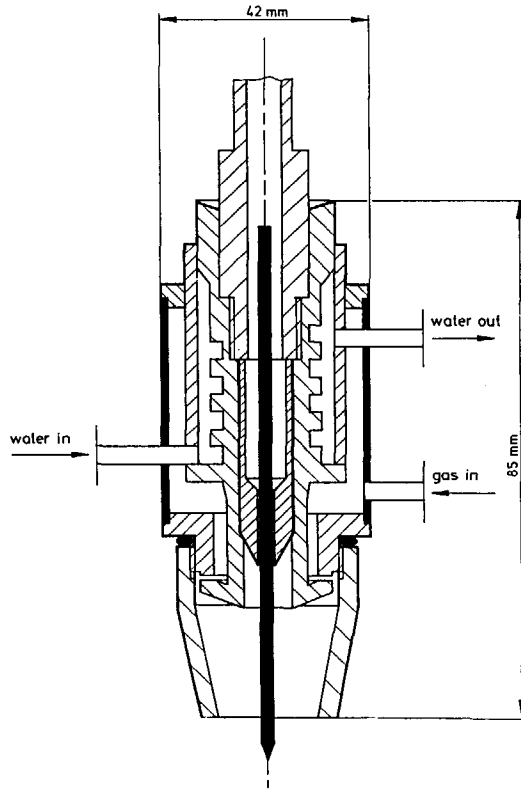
Schematic representation of the welding torch used.
